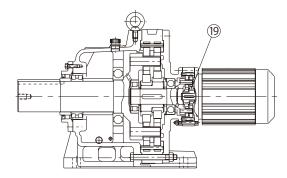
Type CHHM (Horizontal, Gearmotor), 2 Stage Reduction (Example: Frame size 6225DB)
